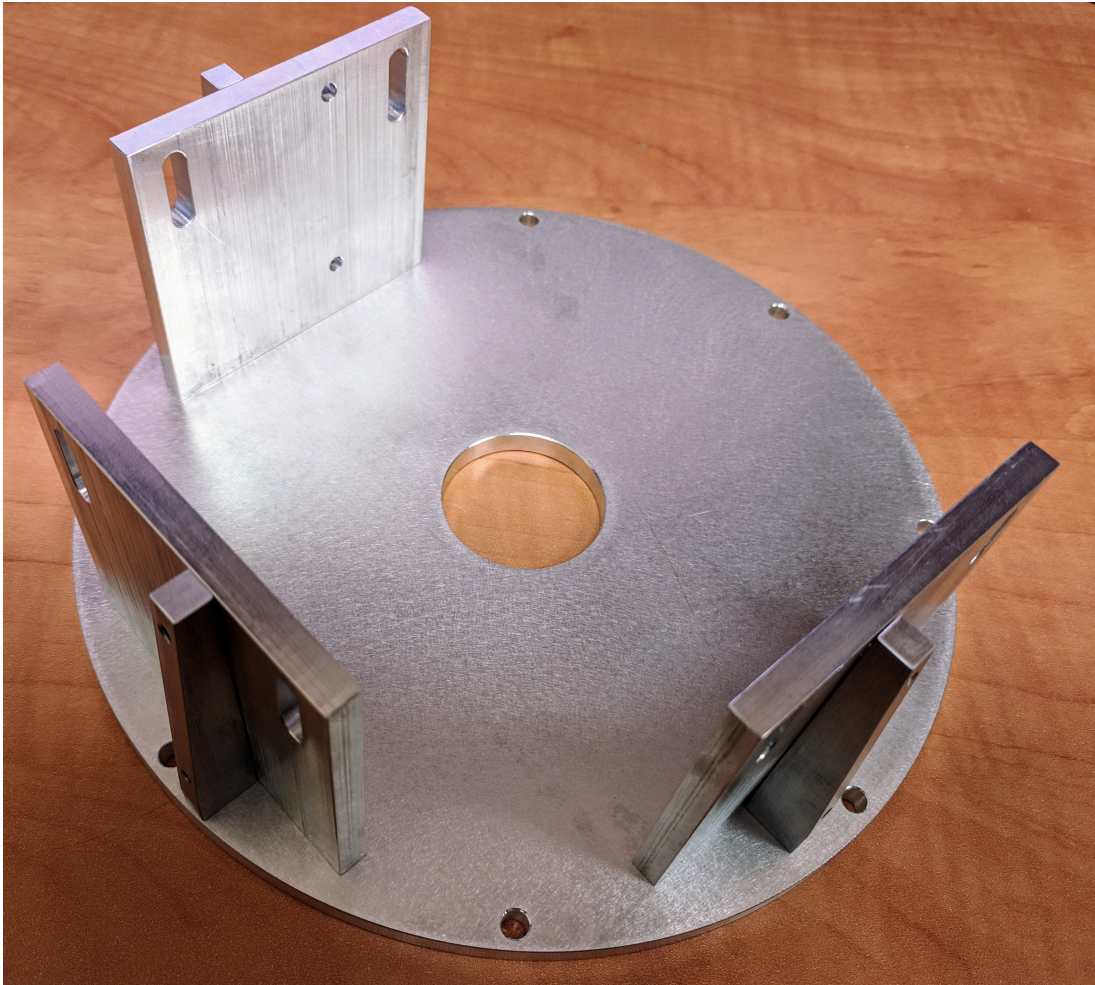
The completed bracket, fabricated in the Steward Observatory machine shop.
